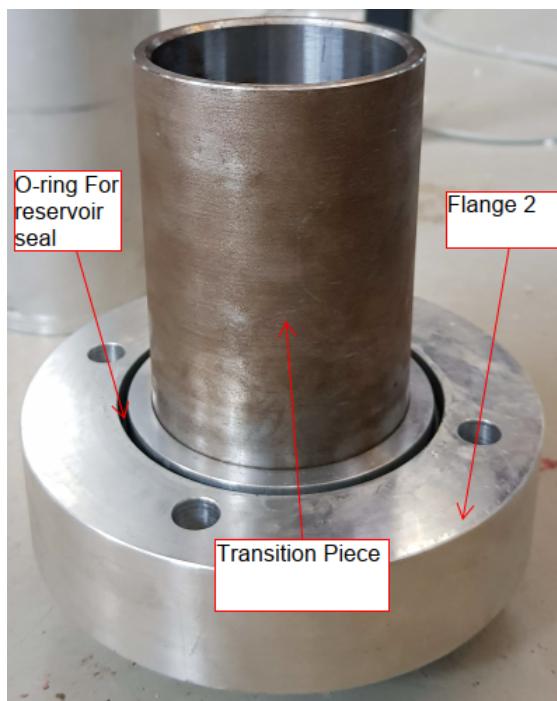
Transition Piece and Flange 2 Sub assembly
